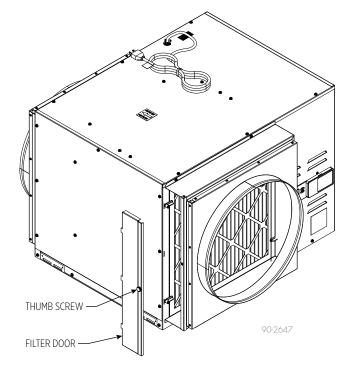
ATTACH ASSEMBLED DUCT HOUSING
